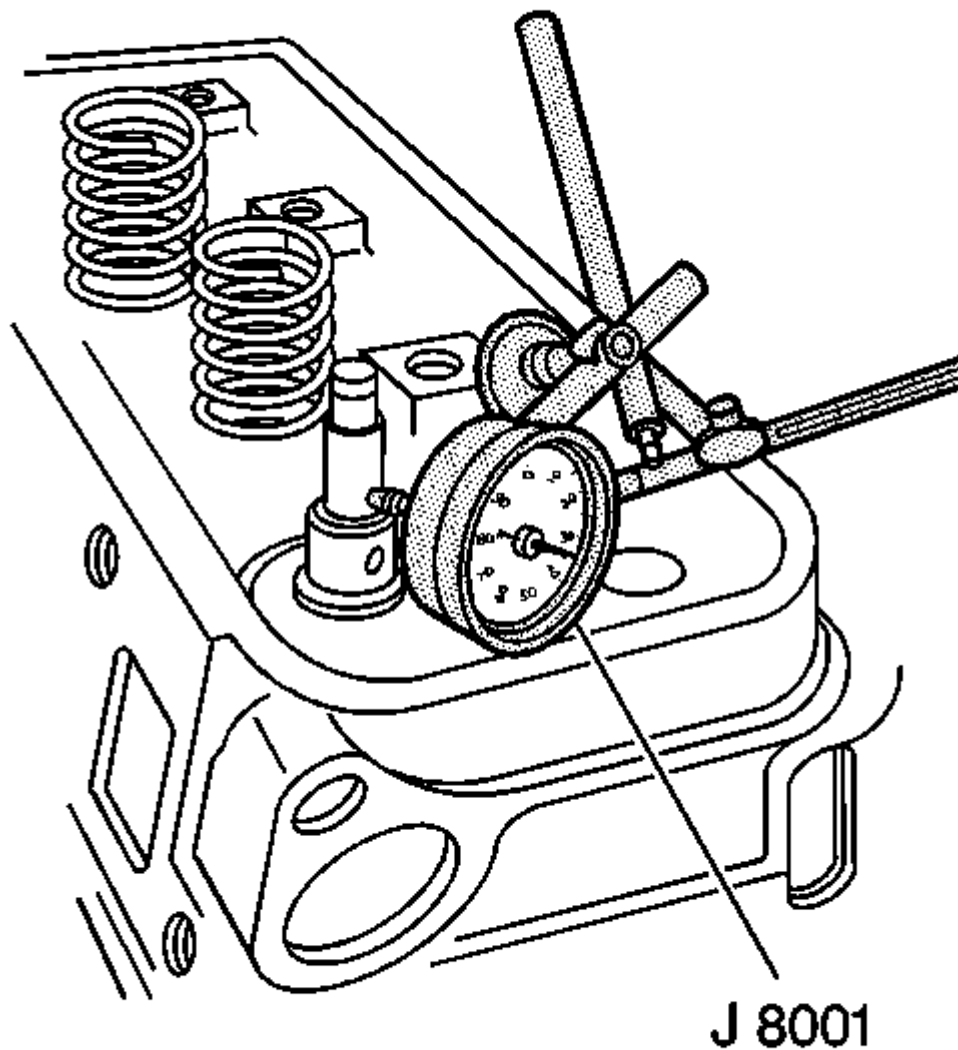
Measuring Amount of Valve Stem Movement with J 8001
